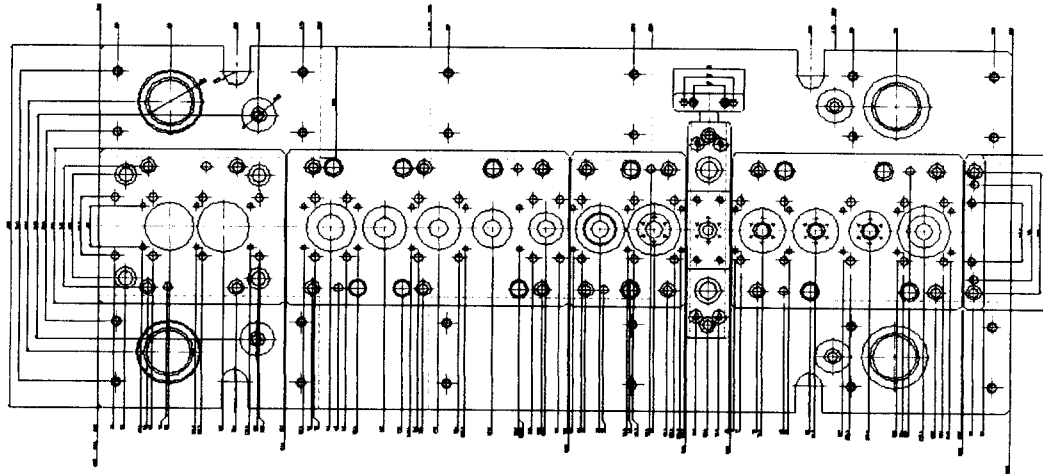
(b) Summary assembling drawing of the die design on top view "B-B" of Fig.6
